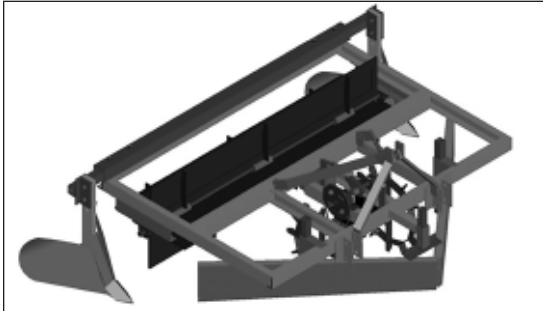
Three-dimensional isometric representation of a basin lister with two ridging tool attachment in a cad design
